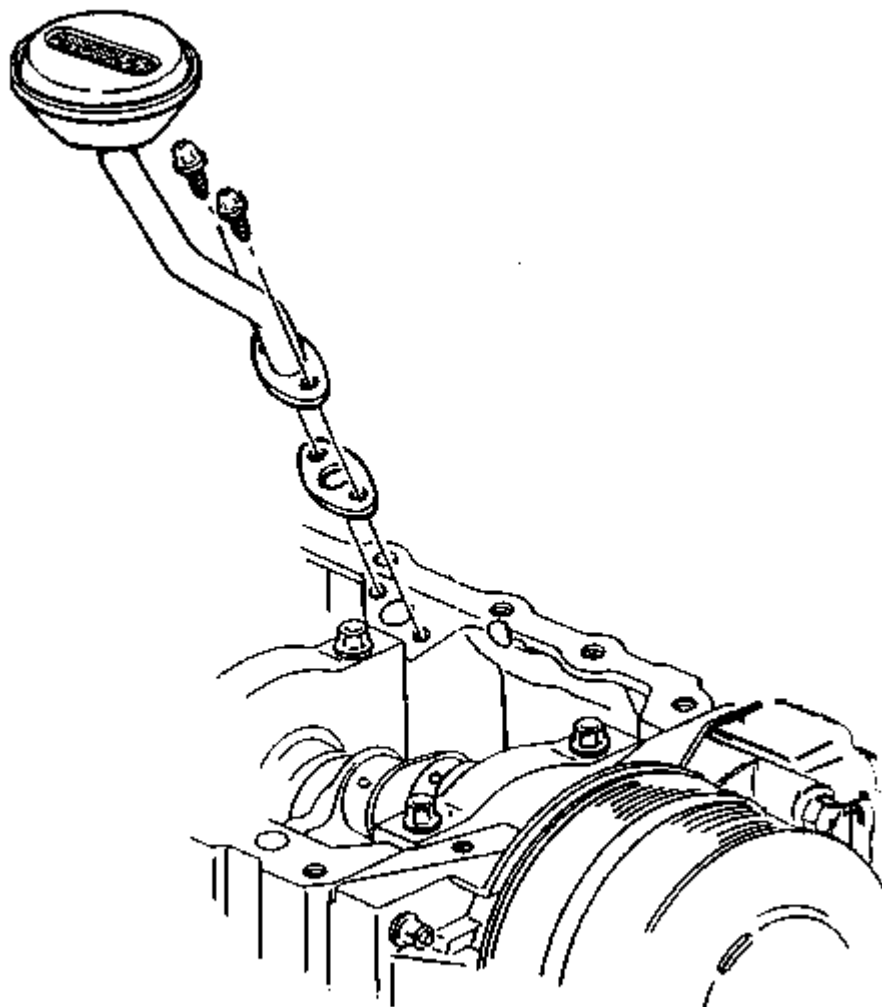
View Of Oil Pump Pipe & Screen Assembly
